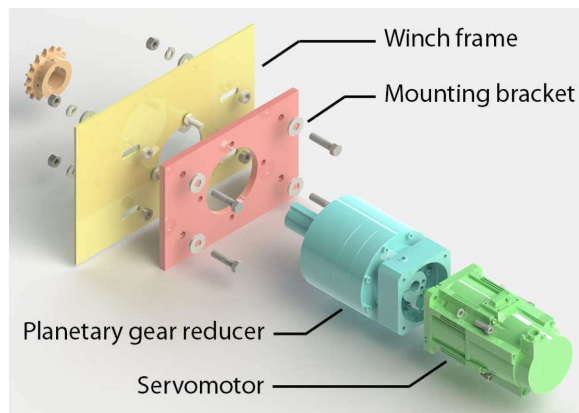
Yaskawa Servo and Planetary Gearbox Reducer (Balingit, Spieler, & Jen, 2013).
